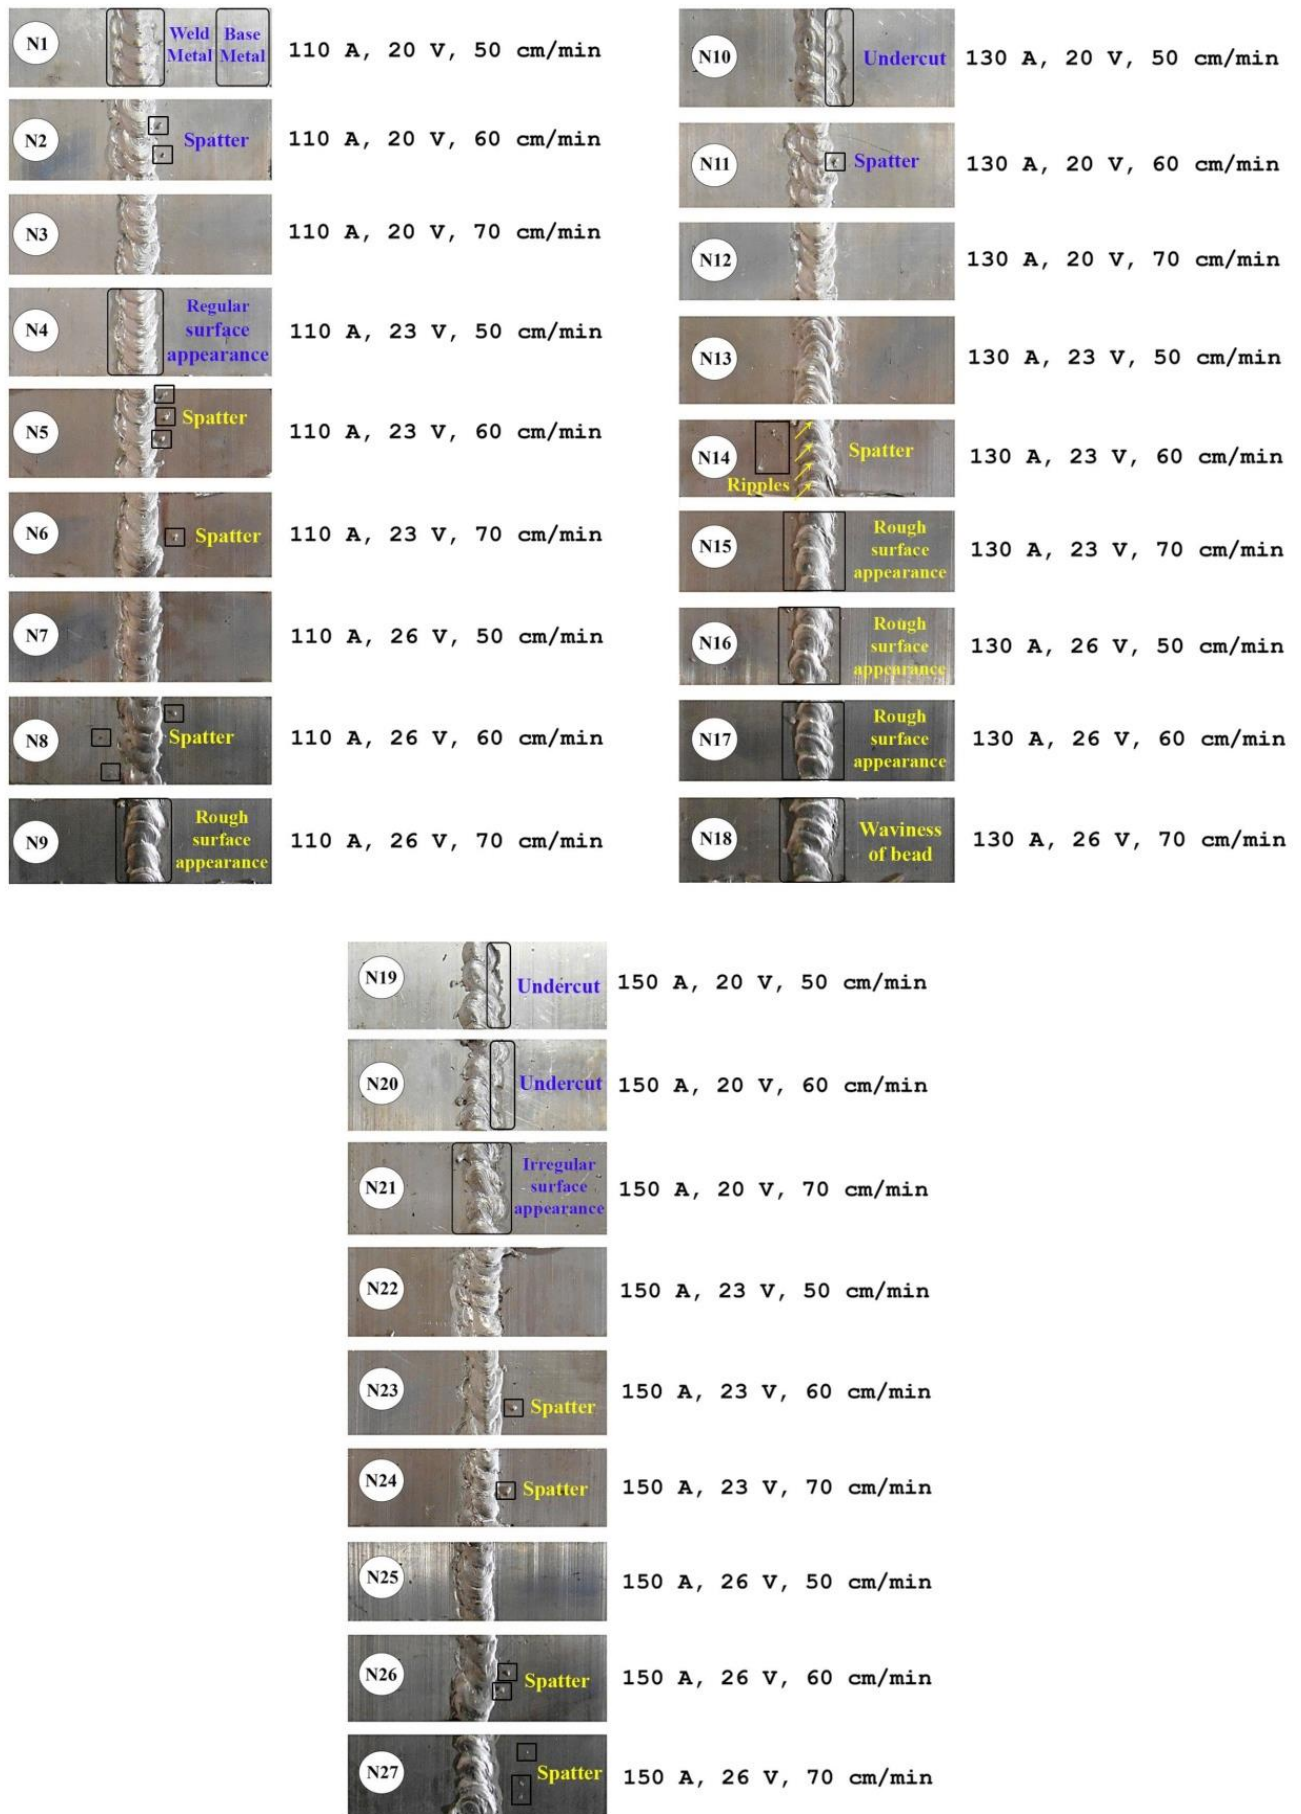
Top surface of welded joints in AA6061 aluminum alloy.
